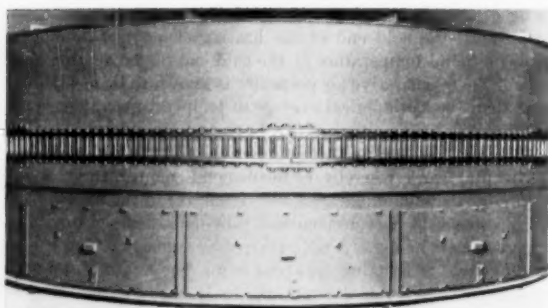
ROTOR WITH PANELS IN PLACE CLOSING OPENINGS THROUGH WHICH COLD-END BASKETS ARE WITHDRAWN
